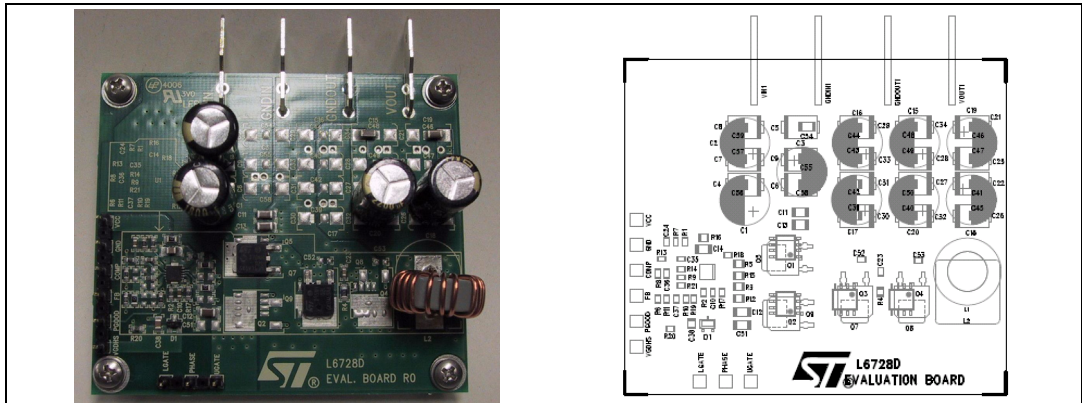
20 A demonstration board top (left) and bottom (right) layers
